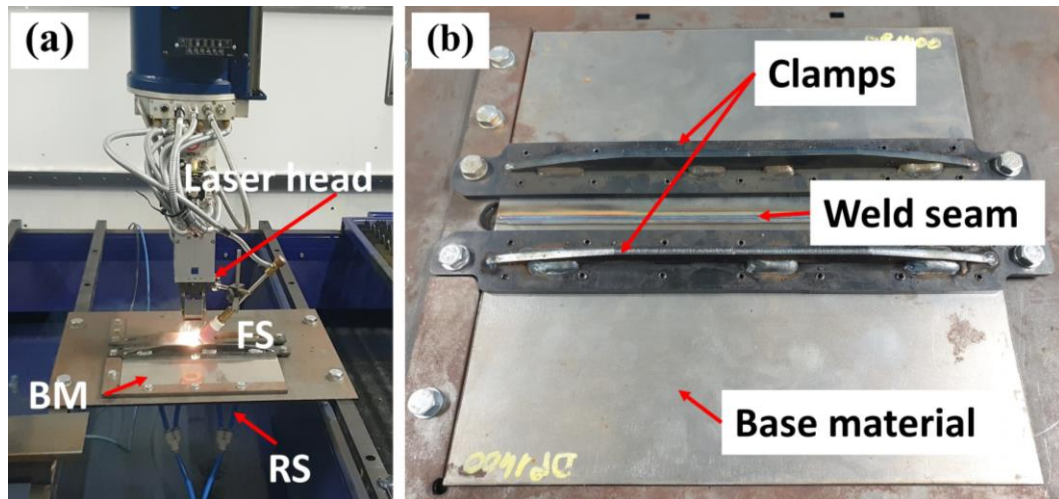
LBW process; (BM - base material; FS - face shielding; RS - root shielding); (a) experimental set-up (b) welded joint.
